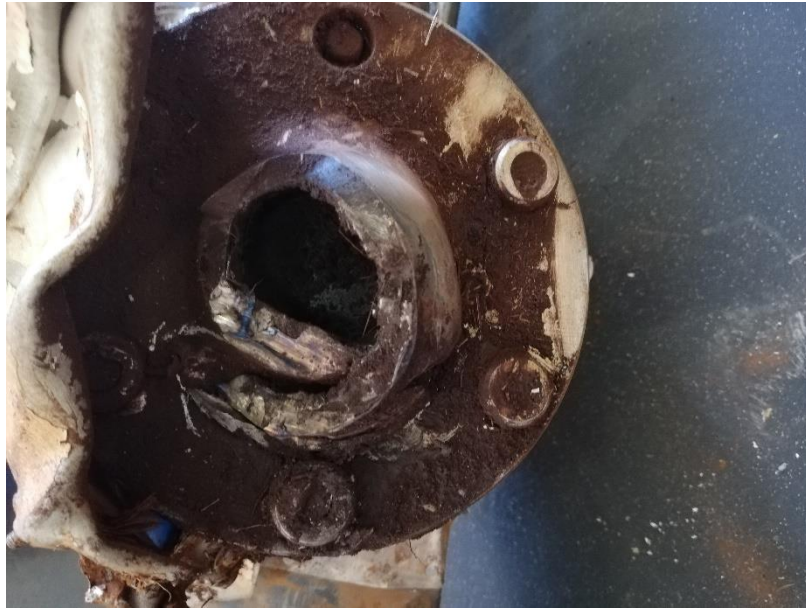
Close view of the propeller that detached from the crankshaft flange.
